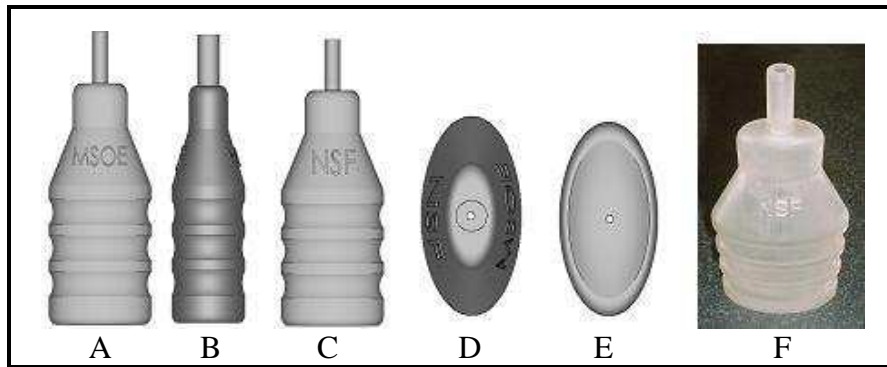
Bottle Pattern created on SolidWorks® and RP Magics A) Front View, B) Side View, C) Back View, D) Top View, E) Bottom View, F) Final Bottle Pattern.
